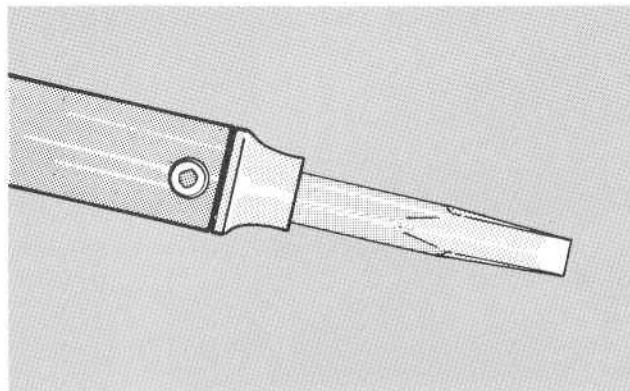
Soldering iron tip properly shaped and tinned.
